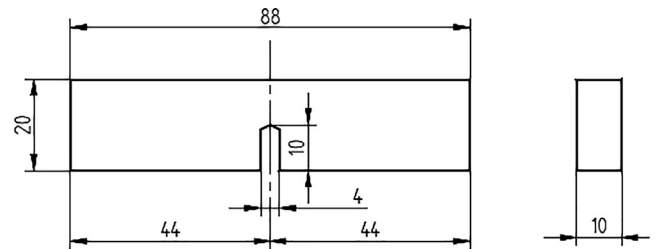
SENB Specimens for fracture test (all dimensions are in mm).
